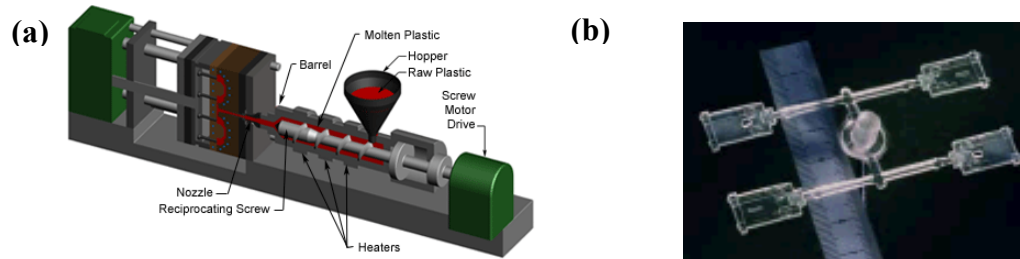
(a) injection molding machine, and (b) a typical example of an injection-molded part (fiber connectors as removed from the tool using a 4 cavity mold).
